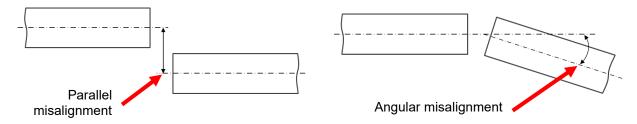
Maximum Allowable Misalignment Between Actuator Shaft and Valve Stem (Figure is exaggerated and not to scale)
